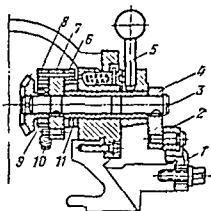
Tool slide vertical feed mechanism of the model 7E35 shaper
